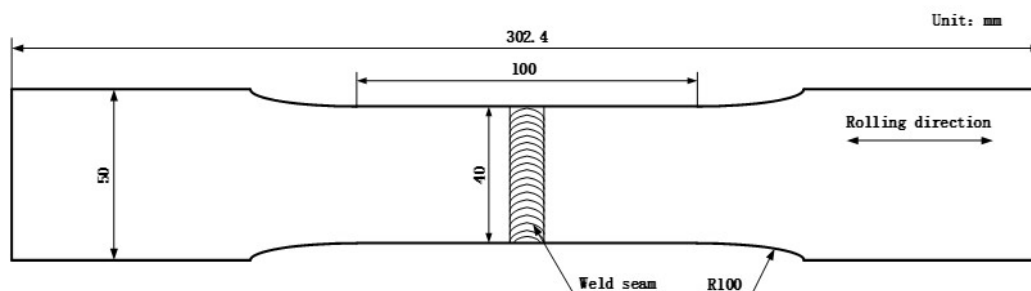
Fatigue test specimen configuration for FSW joints (unit: mm).
